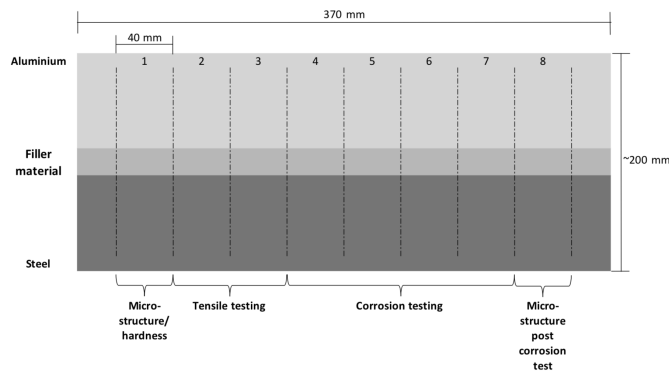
Overview of welded samples and how they were cut and prepared for further testing.
